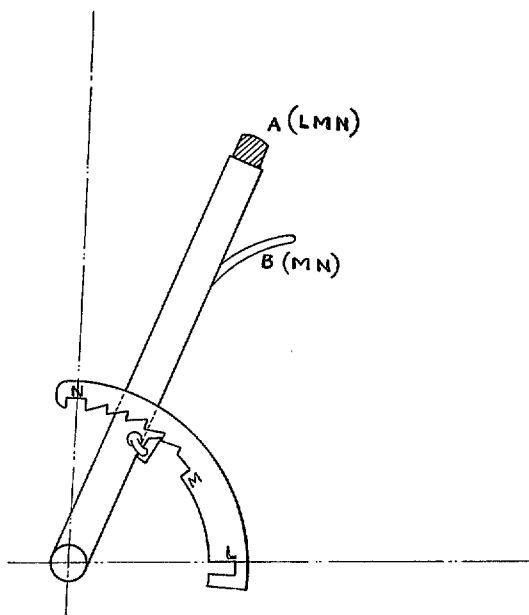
Diagrammatic Sketch of Flap Handle showing Master Trigger and Auxiliary Lever.
